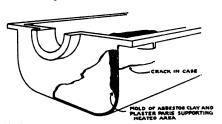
THE BREAK IS BACKED UP WITH A MOLD
